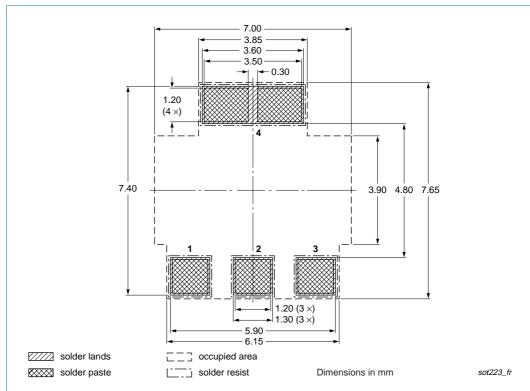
Reflow soldering footprint SOT223 (SC-73)
